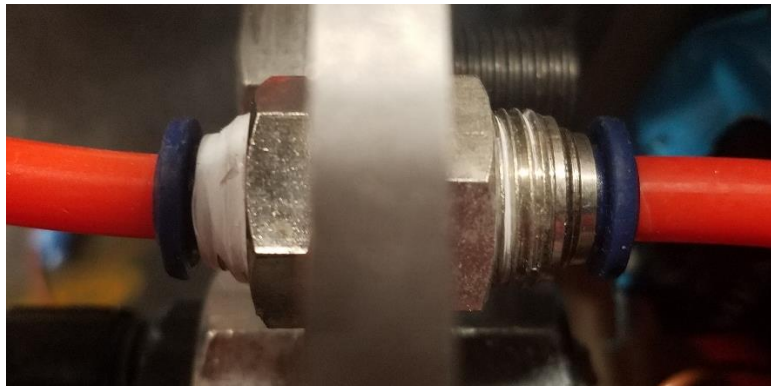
Pneumatic Tube Bulkhead Penetrators
